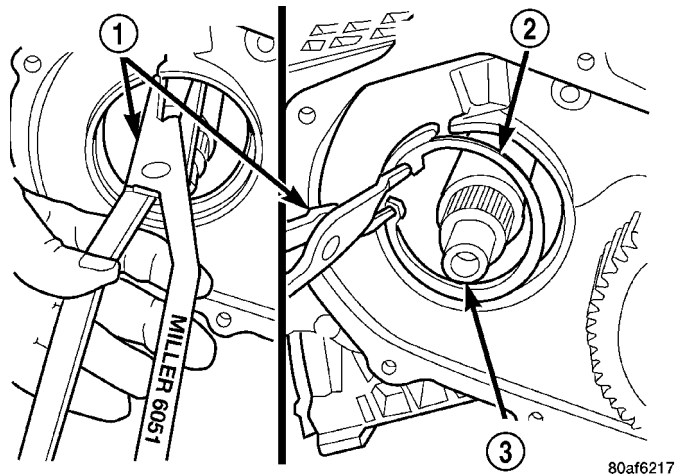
Install Transfer Shaft Bearing Snap Ring
